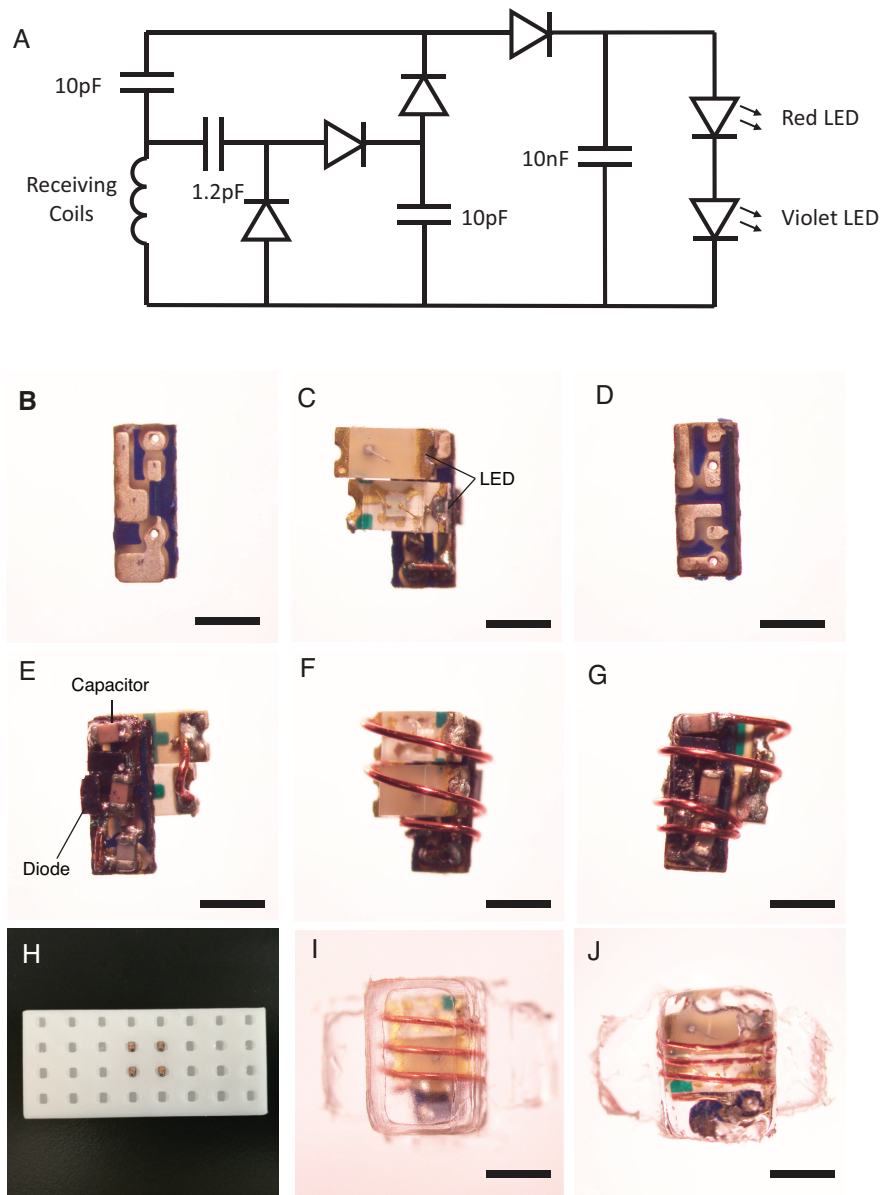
Device assembly. (A) Circuit schematic of the device. (B-E) Components were mounted on a two-sided printed-circuit board (PCB) and (F,G) enameled wire wrapped around the device to form a three-turn helical coil. (H) The completed circuit board was placed in a 3D-printed mold and (I,J) encapsulated in transparent silicone. Scale bar, 1 mm.
